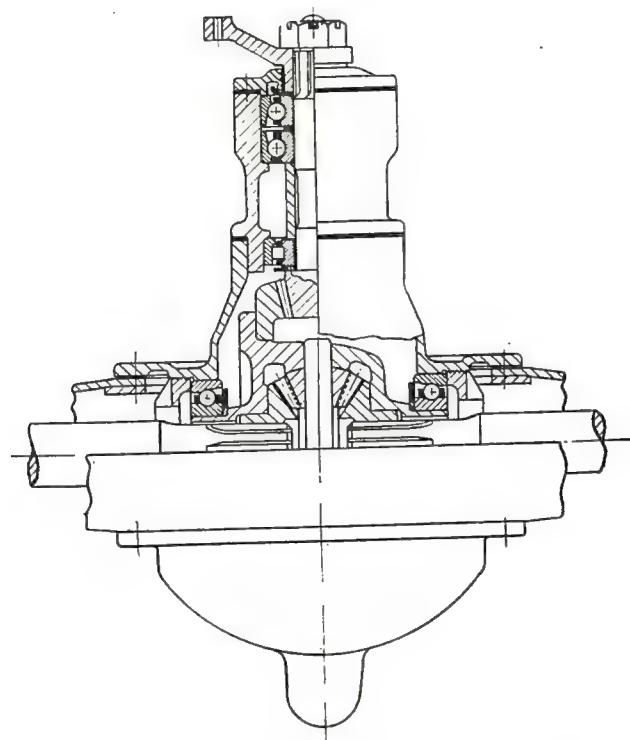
Ball and Roller Bearings to Rear Axle Drive.
